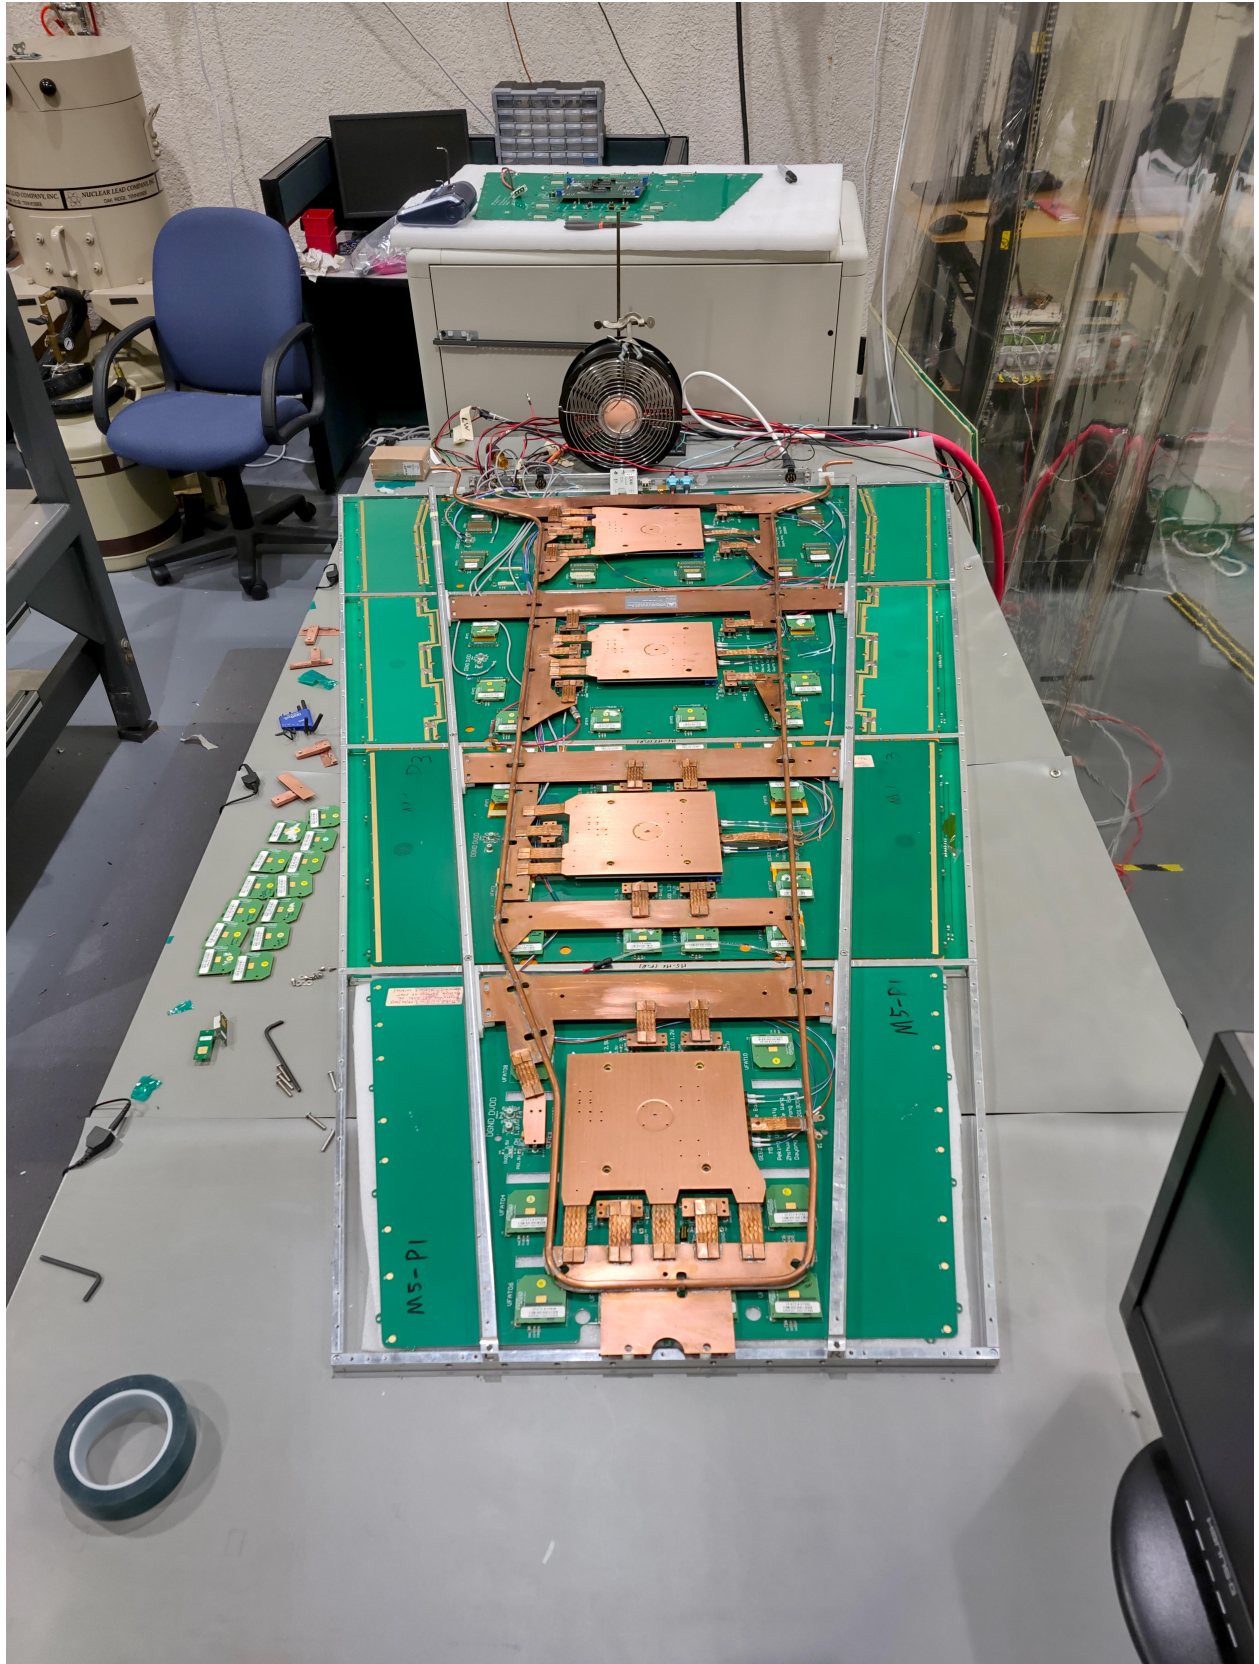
Cooling circuit mounted on the GE2/1 front chamber.
